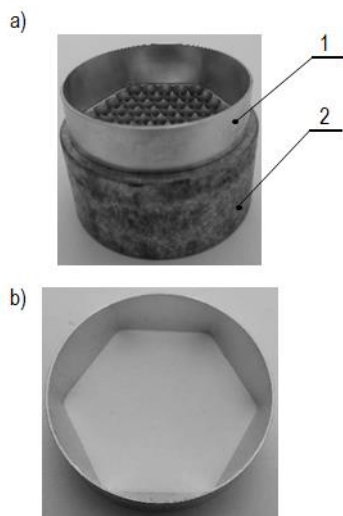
Assembly comprising the multi-channel die plate and compression tube reducer a) entire assembly, b) stress concentration reducer: 1 – reducer piece, 2 – multi-channel die plate
